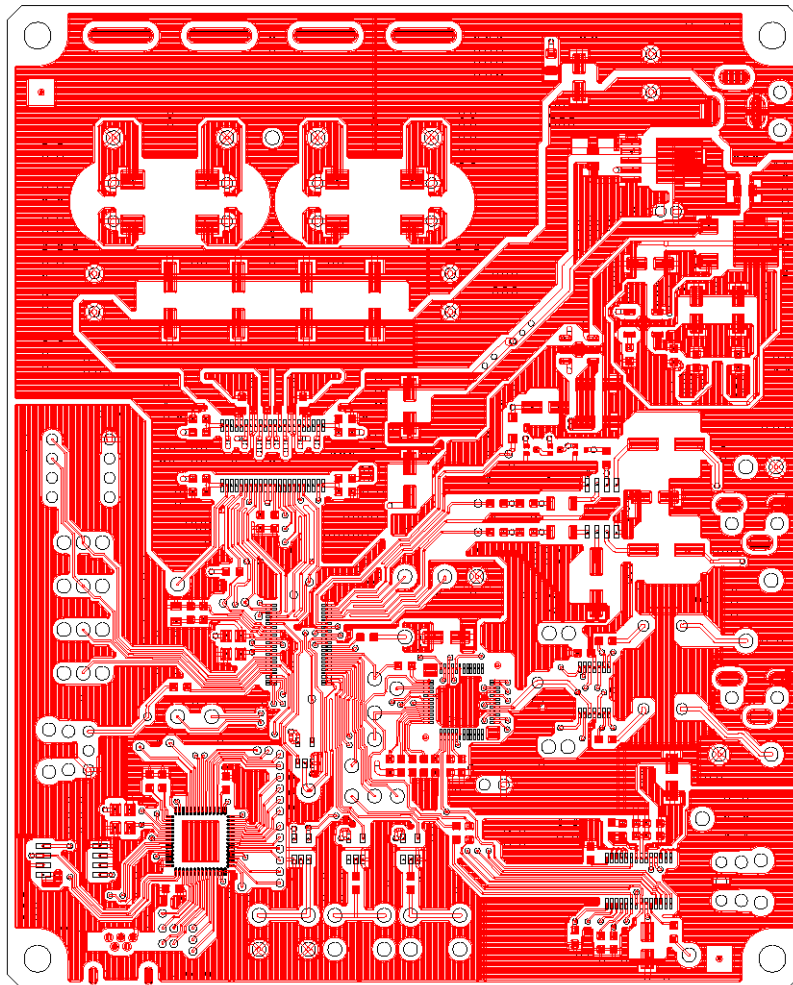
NJU26060 Demo Board (APC-005-1) component side pattern
